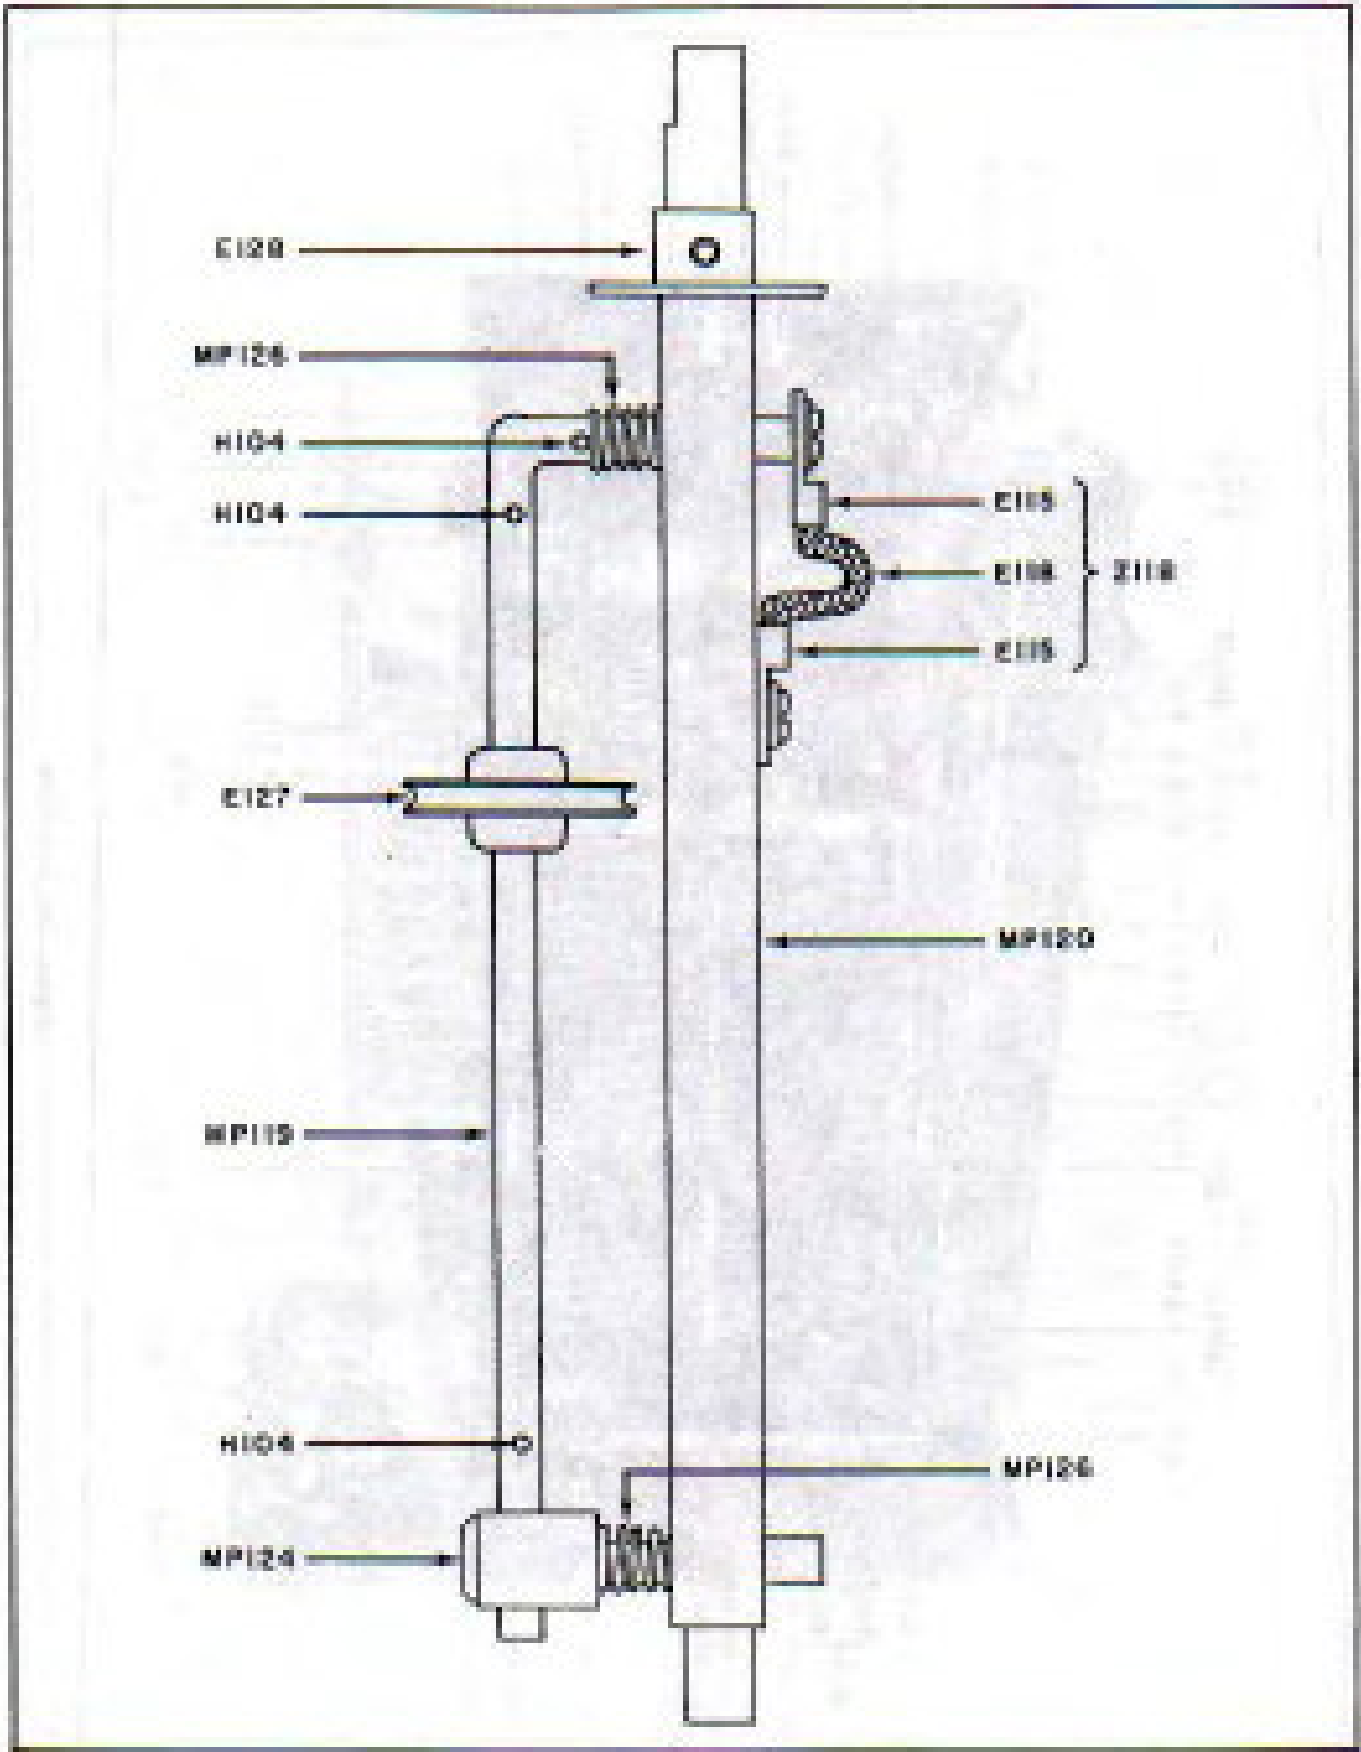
F. Contact Wheel and Shaft Assembly 2387
